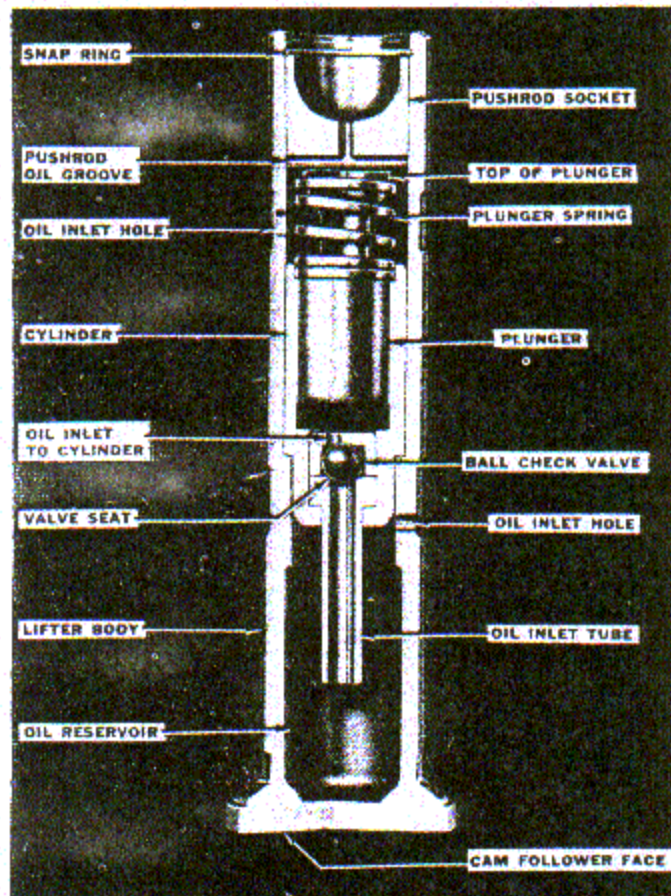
Cutaway View of Hydraulic Valve Lifter
